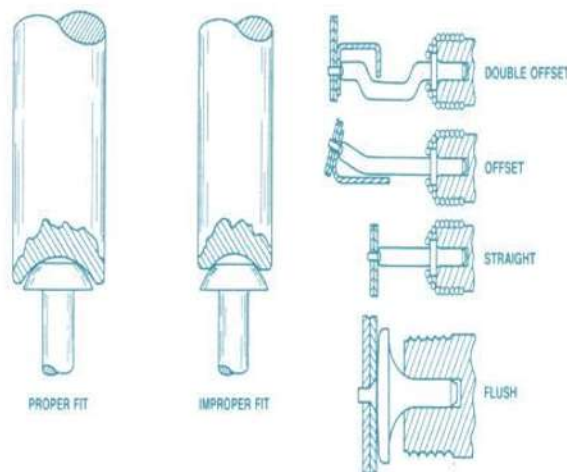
The radius of the cup of the rivet must be slightly larger than the radius of the rivet head. Also shown is a selection of rivet sets.
